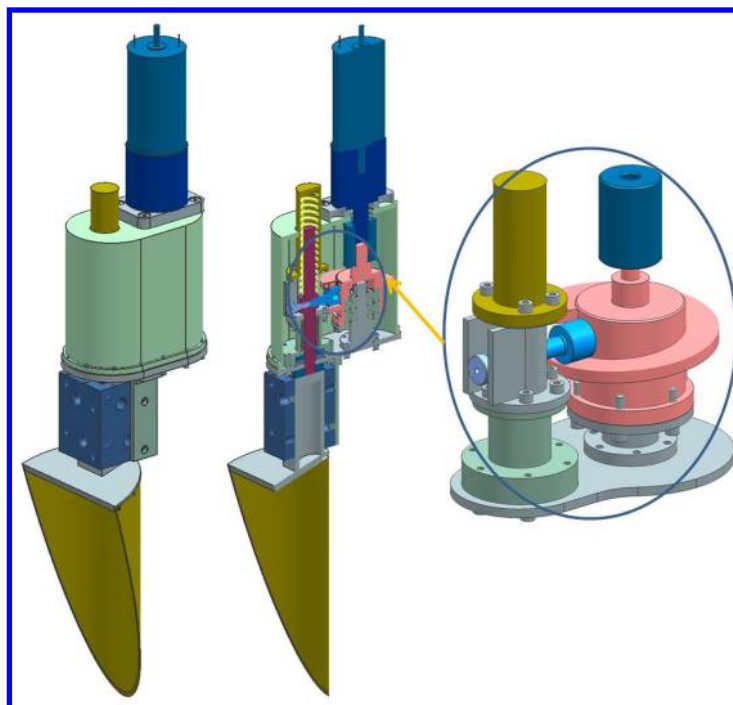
Design of the BiBlade percussive mechanism unit: isometric view (left), cross section (middle), and detail of the helical cam percussive mechanism (right)
